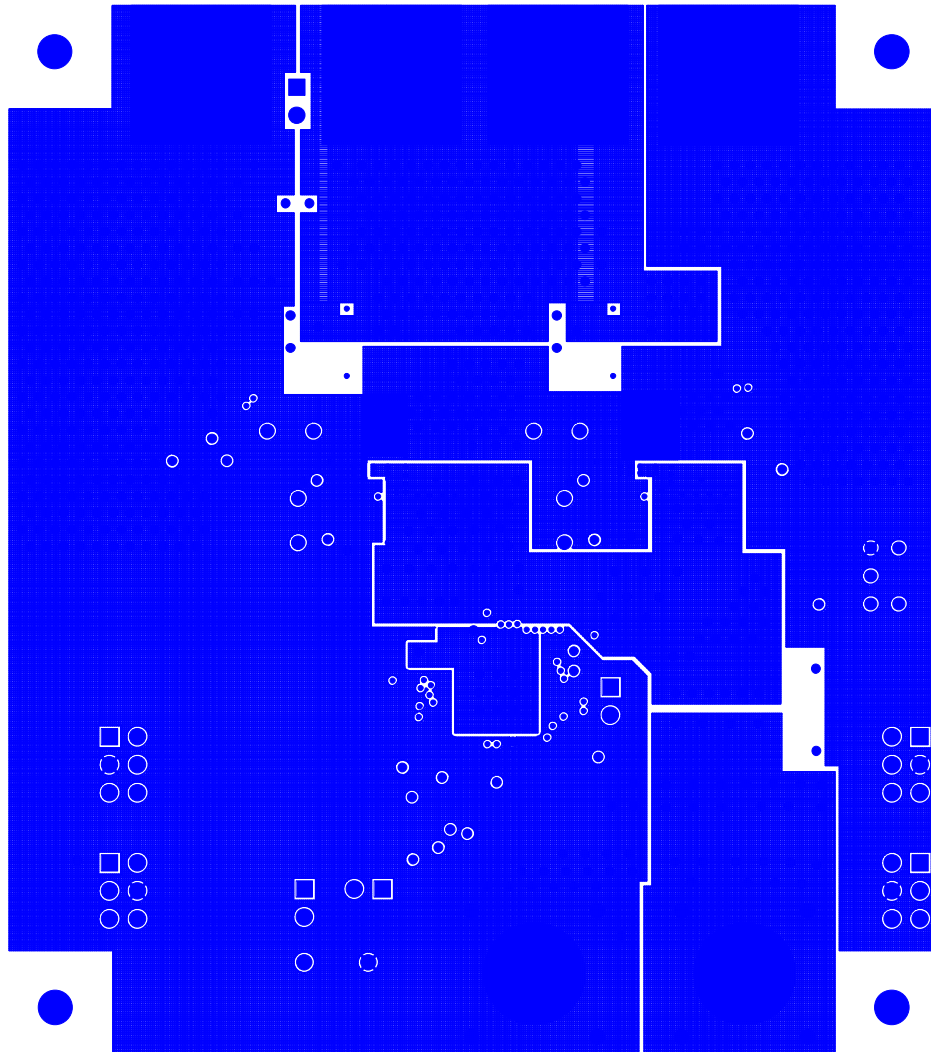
PCB - INNER LAYER 4 (TOP VIEW)
